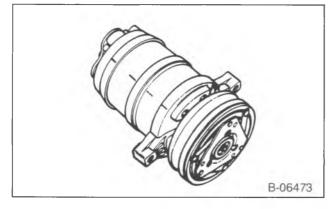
HR-6 Compressor, V-Groove Pulley and Standard Mounting
